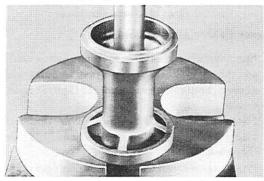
Installing Roller Bearing to Carrier Assembly F. Joining Gear Housing and Drive Shaft Housing
